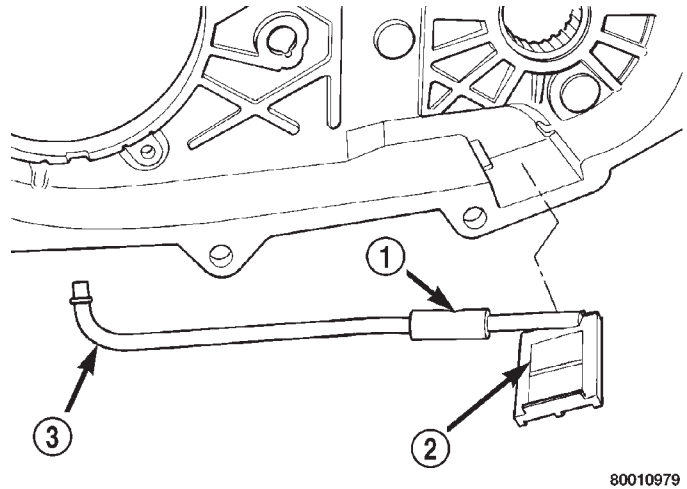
Oil Pickup Screen, Hose And Tube Removal
